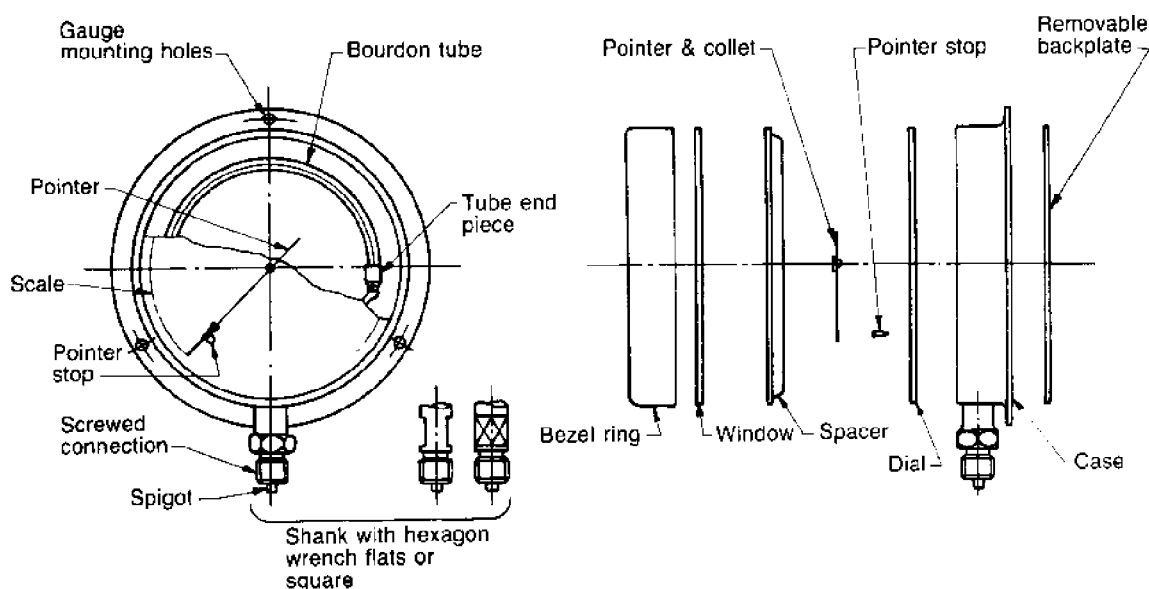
NOMENCLATURE FOR COMPONENT PARTS OF A GAUGE - SURFACE MOUNTING GAUGE WITH C TYPE BOURDON TUBE
